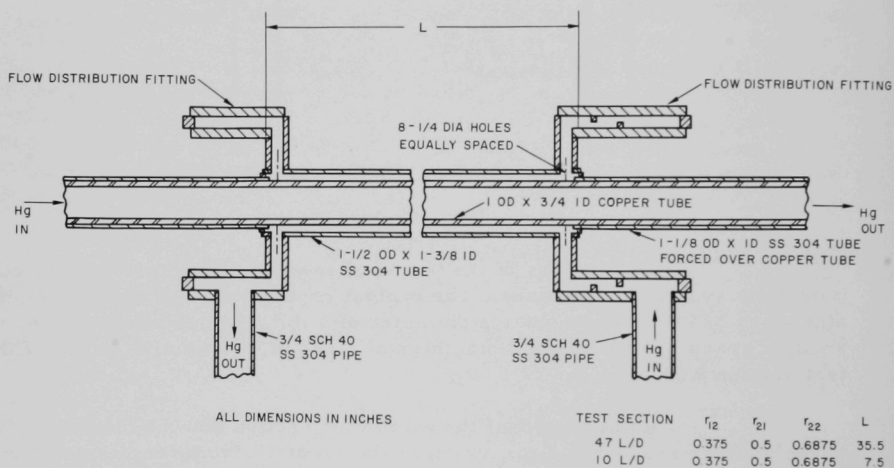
Design of 47- and 10-L/D₁ Test Sections
